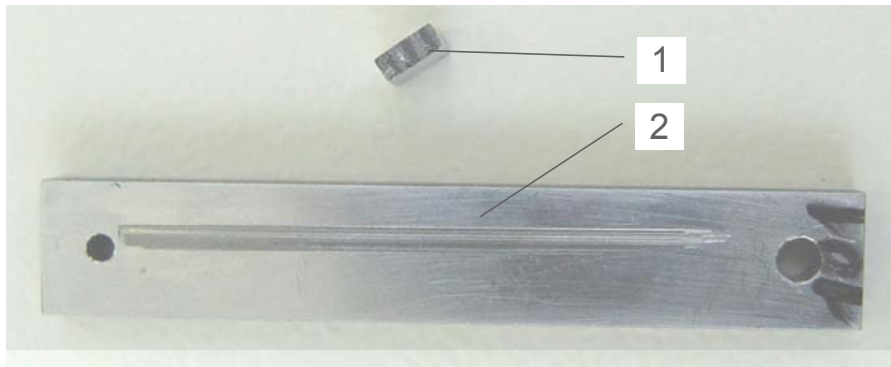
AlSi13Mg1CuNi aluminium alloy specimen (1) and 300 grade cast iron counter-specimen (2) after testing on TPZ-1 tribometer. A view of the working surfaces of the specimens. Material code 101
